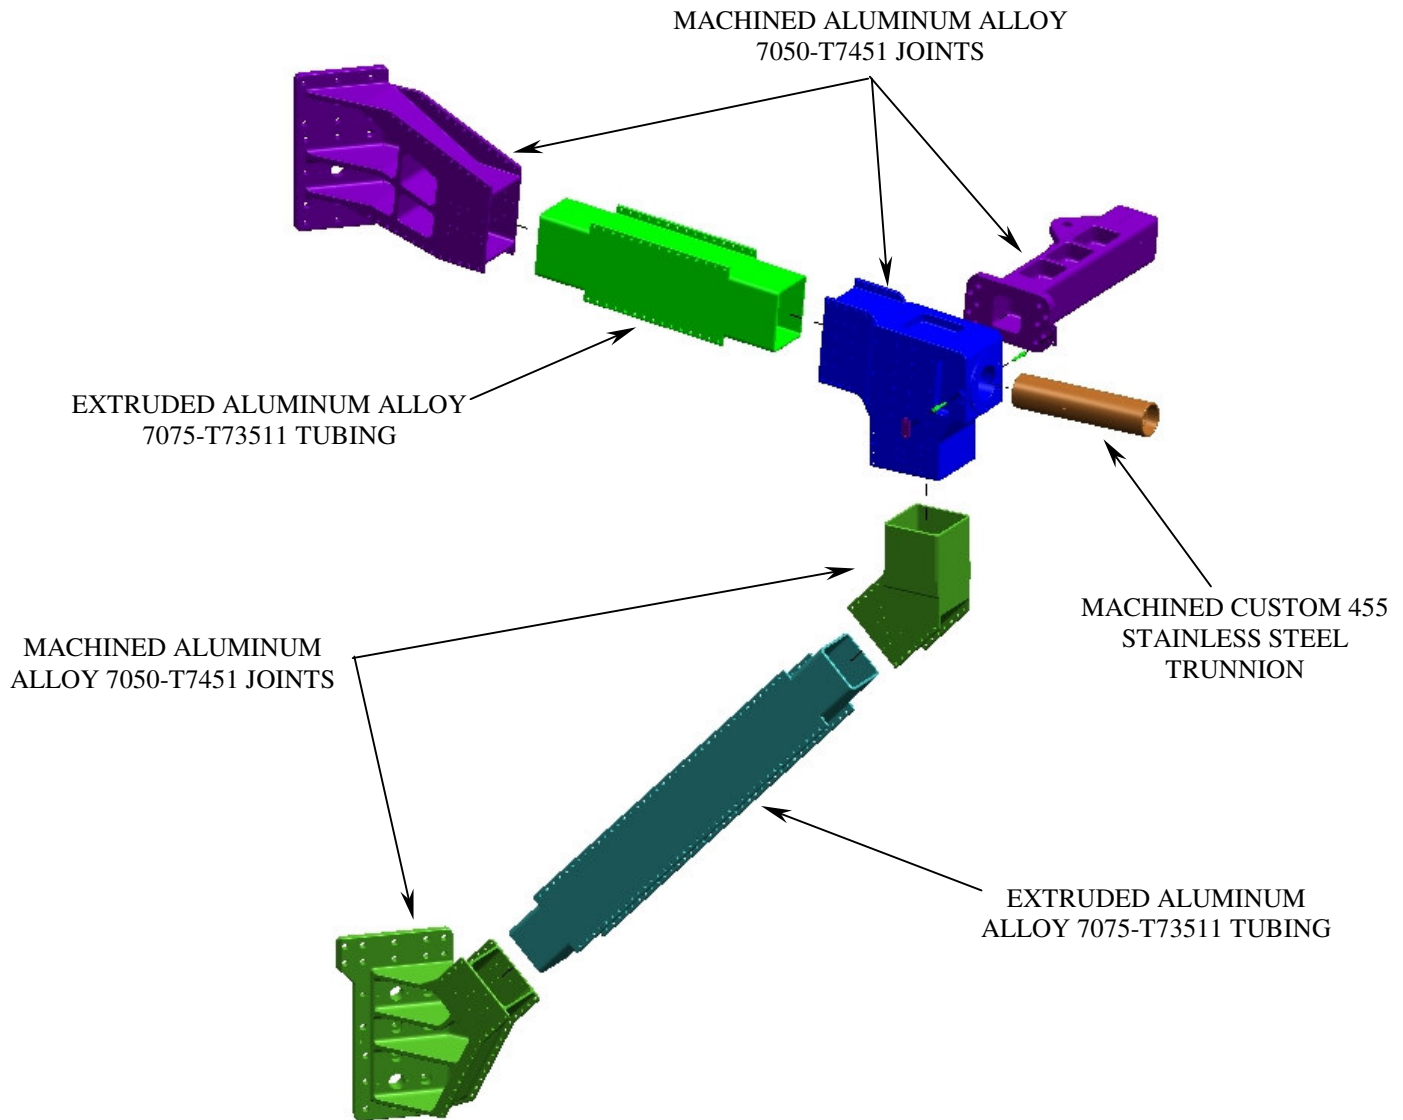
USS-02 Construction with Aluminum Tubes and Machined Joints
